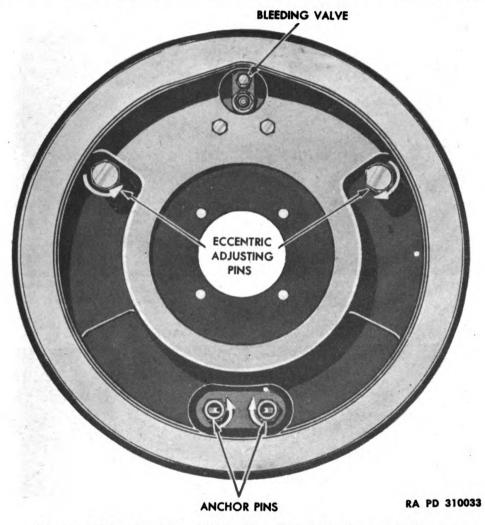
Backing Plate, Showing Location of Adjusting Cams, Anchor Pins, and Bleeding Valve
